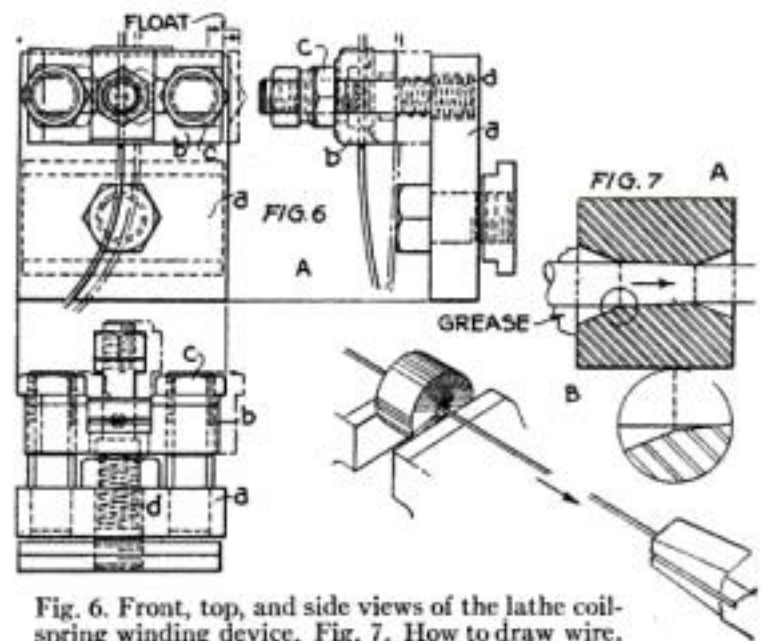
Front, top, and side views of the lathe coil-spring winding device. Fig. 7. How to draw wire.
